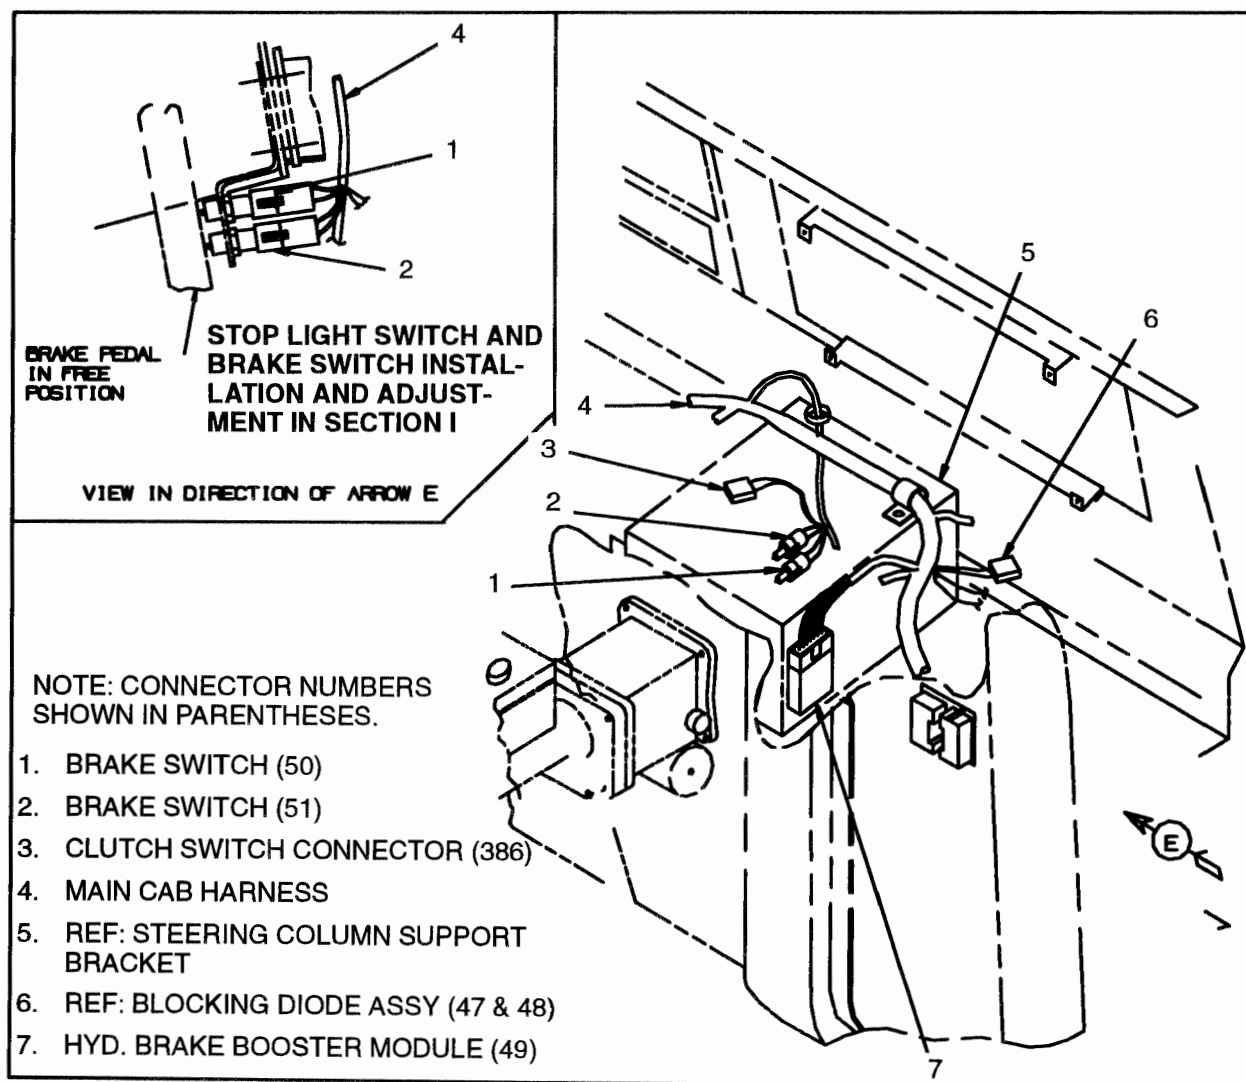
Truck BNO/BNC Hydraulic Brake Switches
